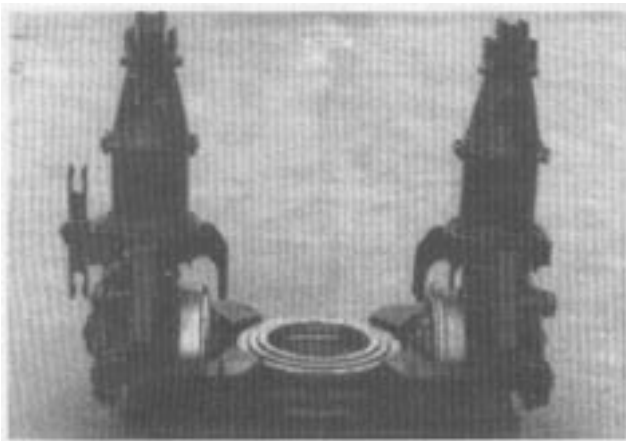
VLC LF-LRV single wheelset trailer running gear.
